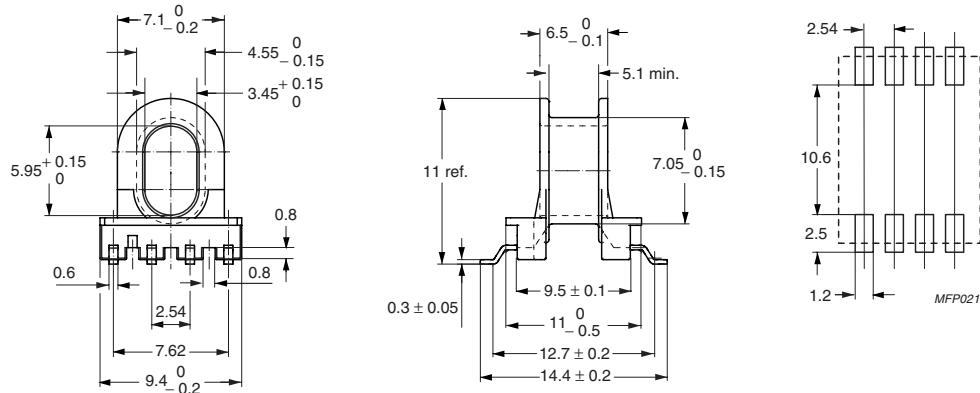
EPX9 coil former: 8-pads, 2 mm pad distance.
